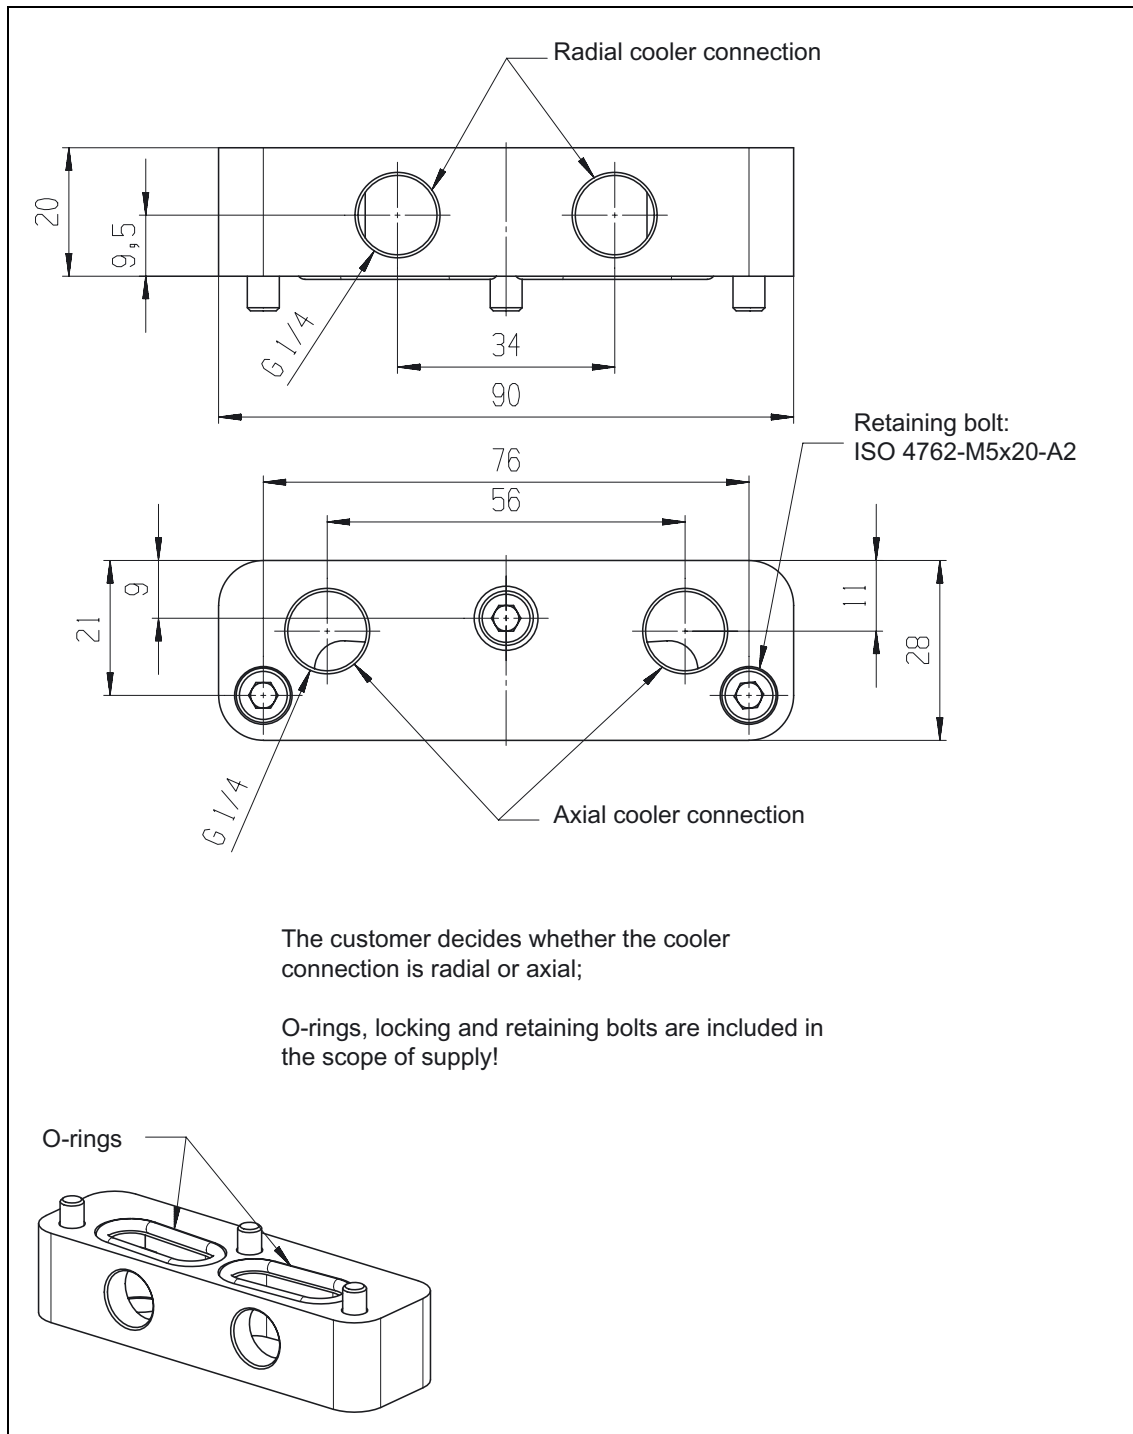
Cooling connection adapter 1FW6160, 1FW6190, 1FW6230
